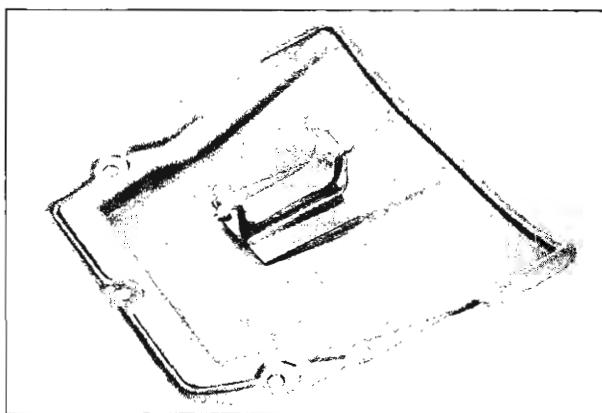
Engine Fan Top Shield Assembly (Underside)
